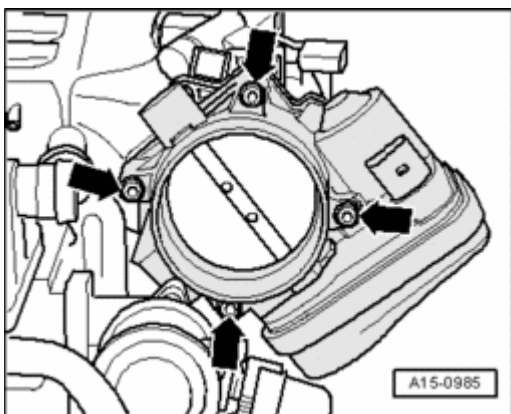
Removing Bolts And Throttle Valve Control Module -J338- From Intake Manifold
